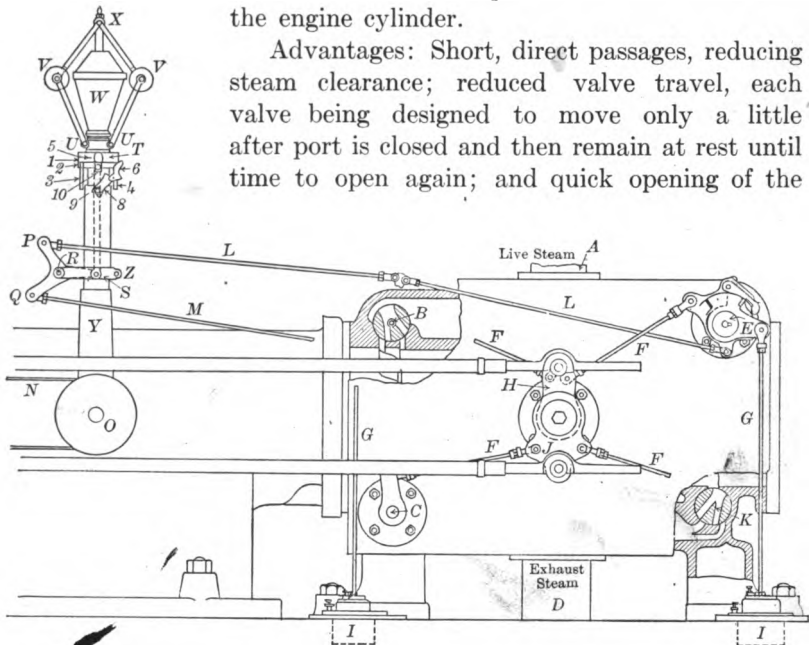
CYLINDER, VALVES, VALVE GEAR, AND GOVERNOR FOR A CORLISS ENGINE
